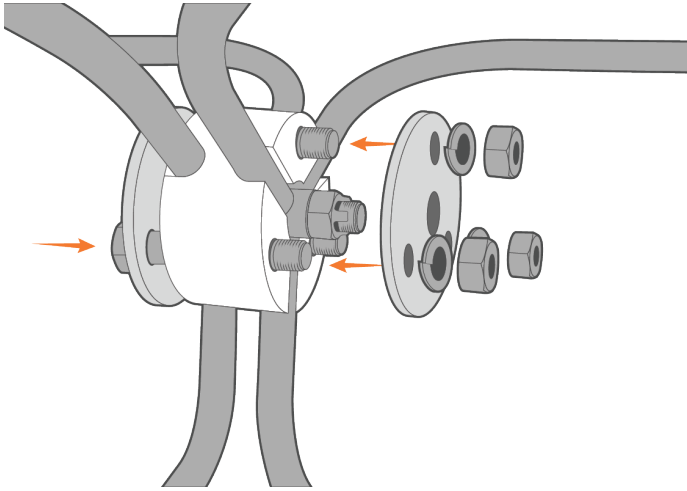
Place the cage and buoy frame within the security bracket mount.
